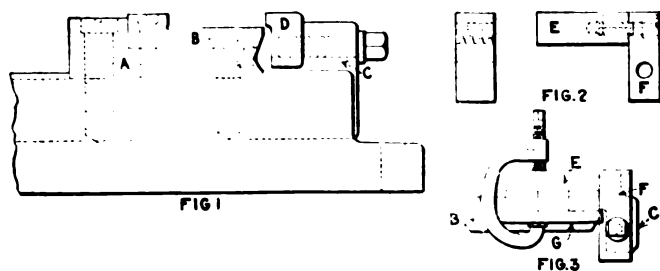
END SECTION OF WORK HOLDING VISE. FIG. 2—THE LOCATING GAGE. FIG. 3—METHOD OF ATTACHING GAGE
